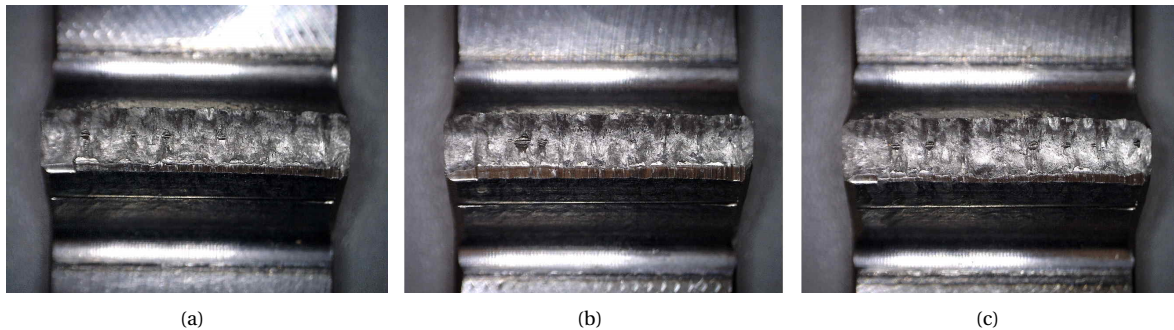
Top view of the static load test specimens showing the fracture surfaces after testing. Used interpass temperatures are: (a) 80°C, (b) 100°C and (c) 130°C
